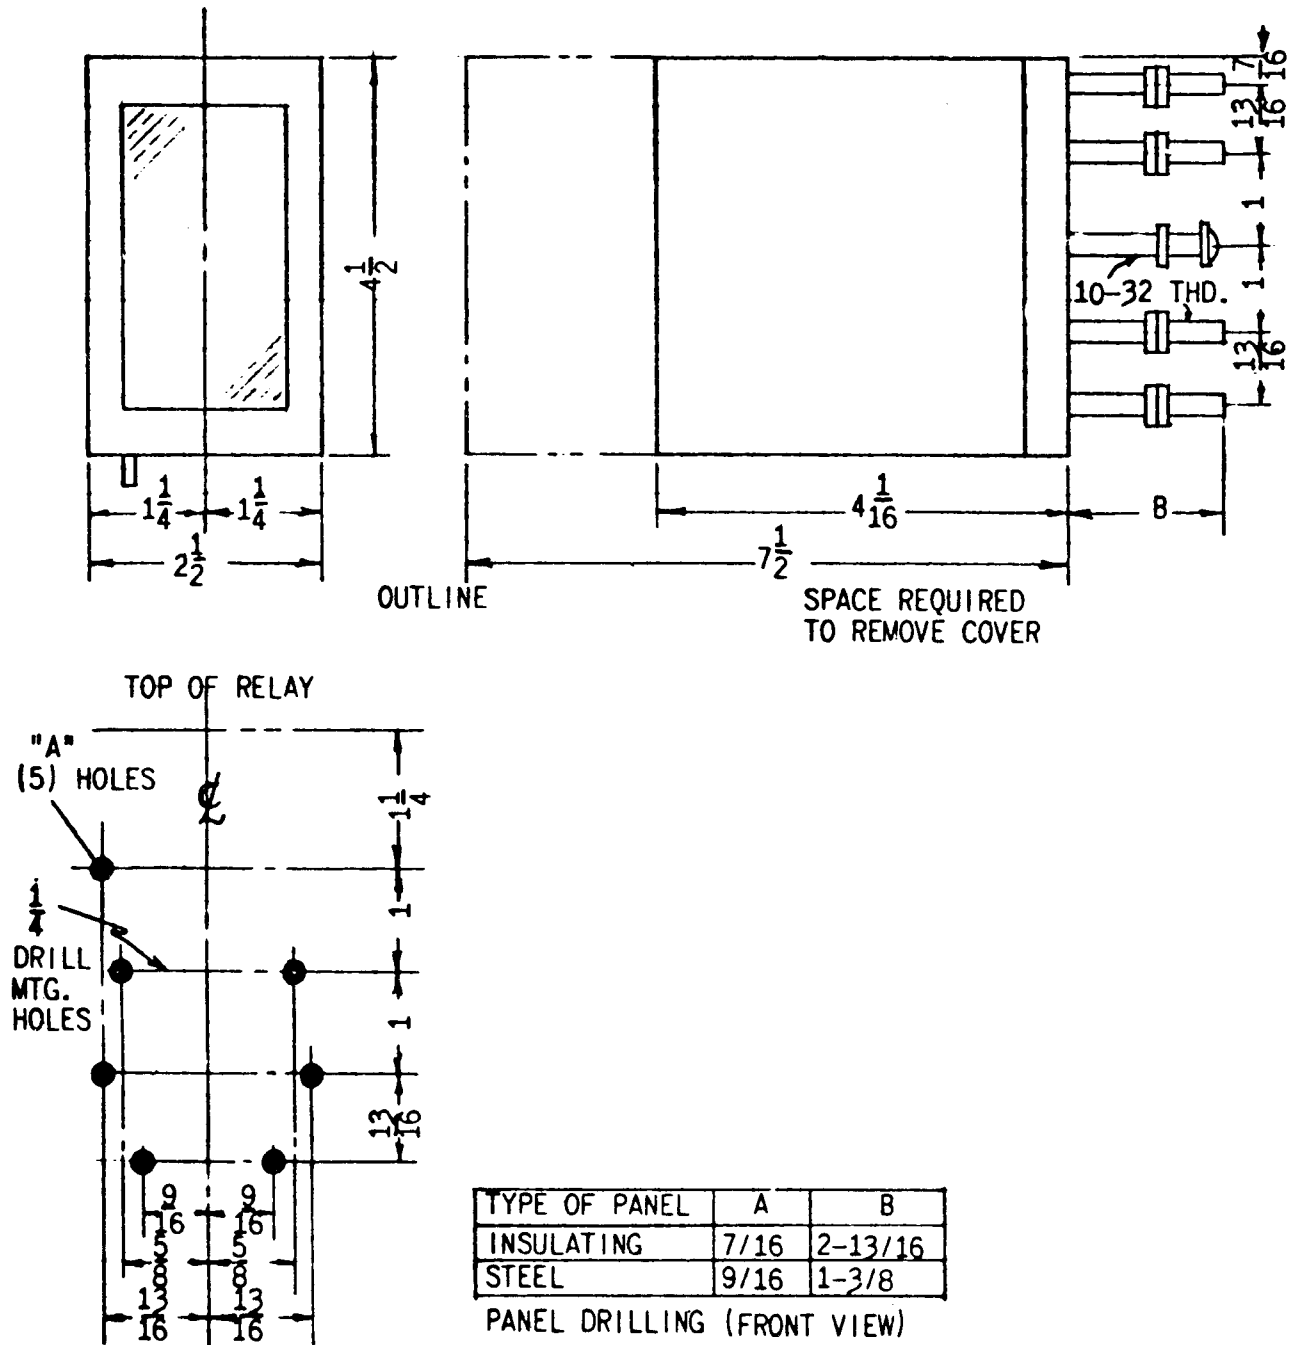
(0165A6003-3) Outline and Panel Drilling Dimensions
